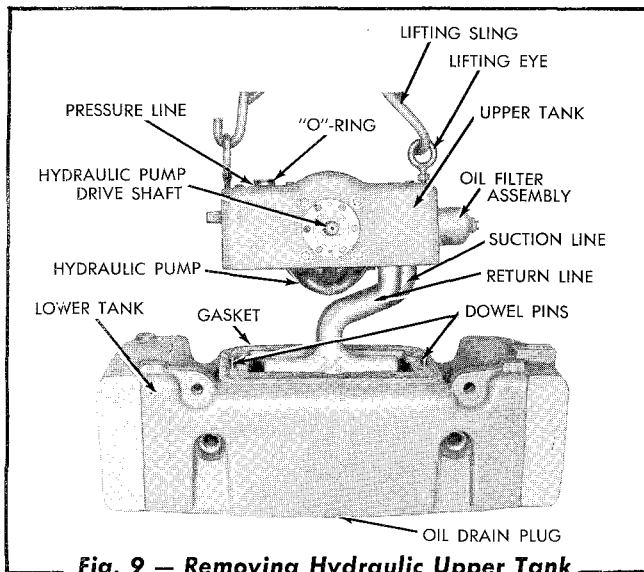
Removing Hydraulic Upper Tank Assembly from Lower Tank (HD 21 Shown — HD 16 and HD 11 Similar)
